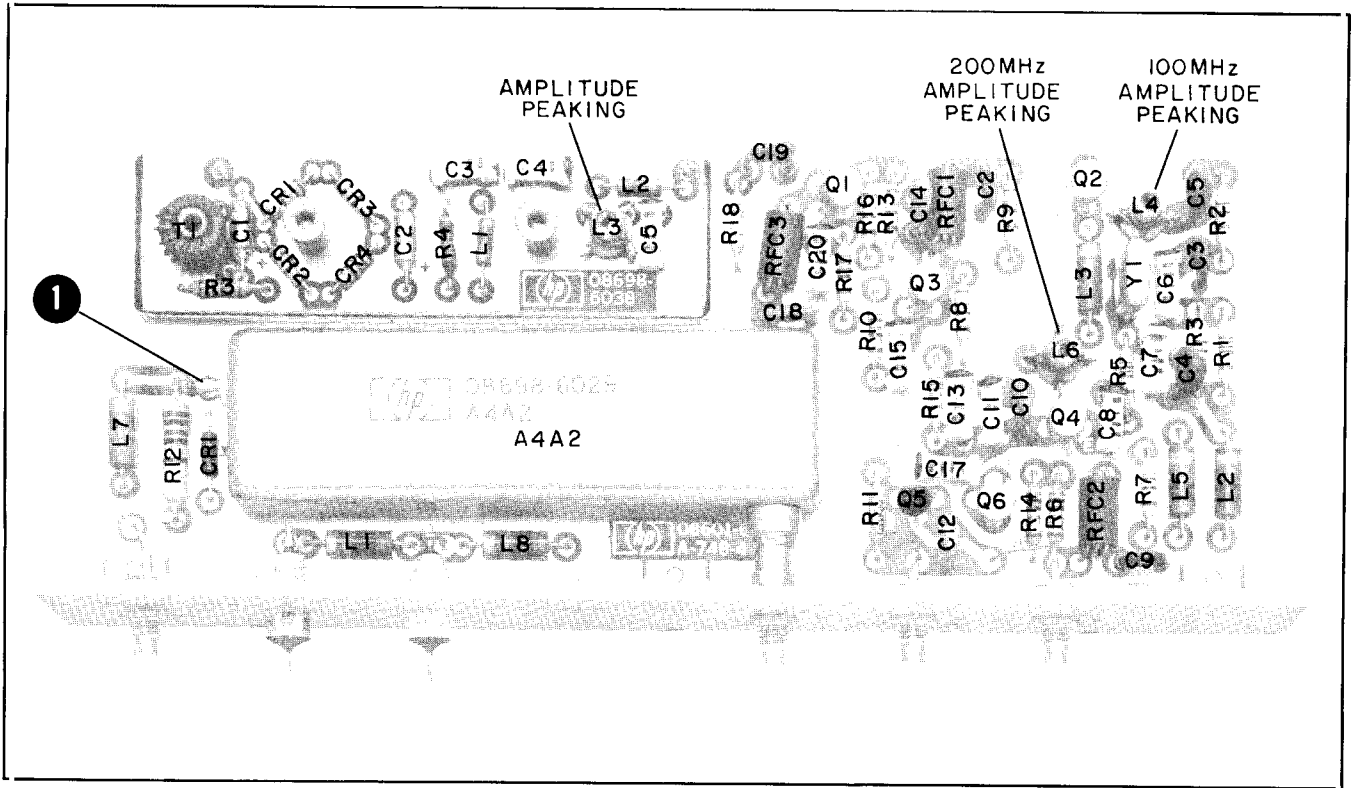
Component Identification, A4A1 Crystal Oscillator Assembly (Part of Change 10)
